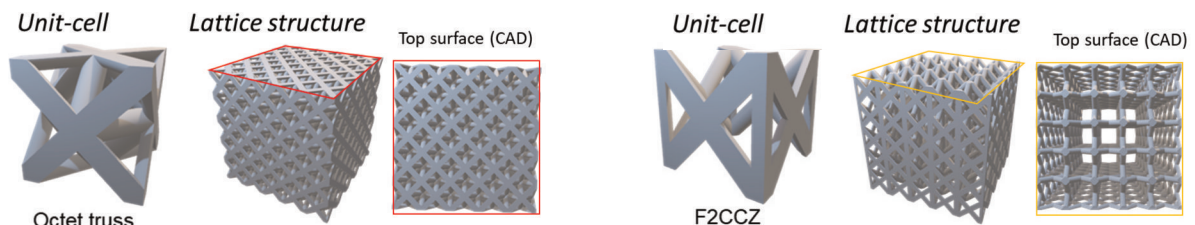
Two copper lattice structures: octet truss (left) and F2CCZ truss (right)
